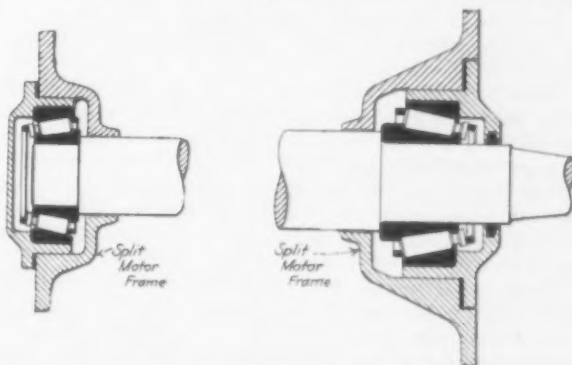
Tapered Roller Bearing in a Split Frame Motor, Permitting Easy Removal of the Armature
